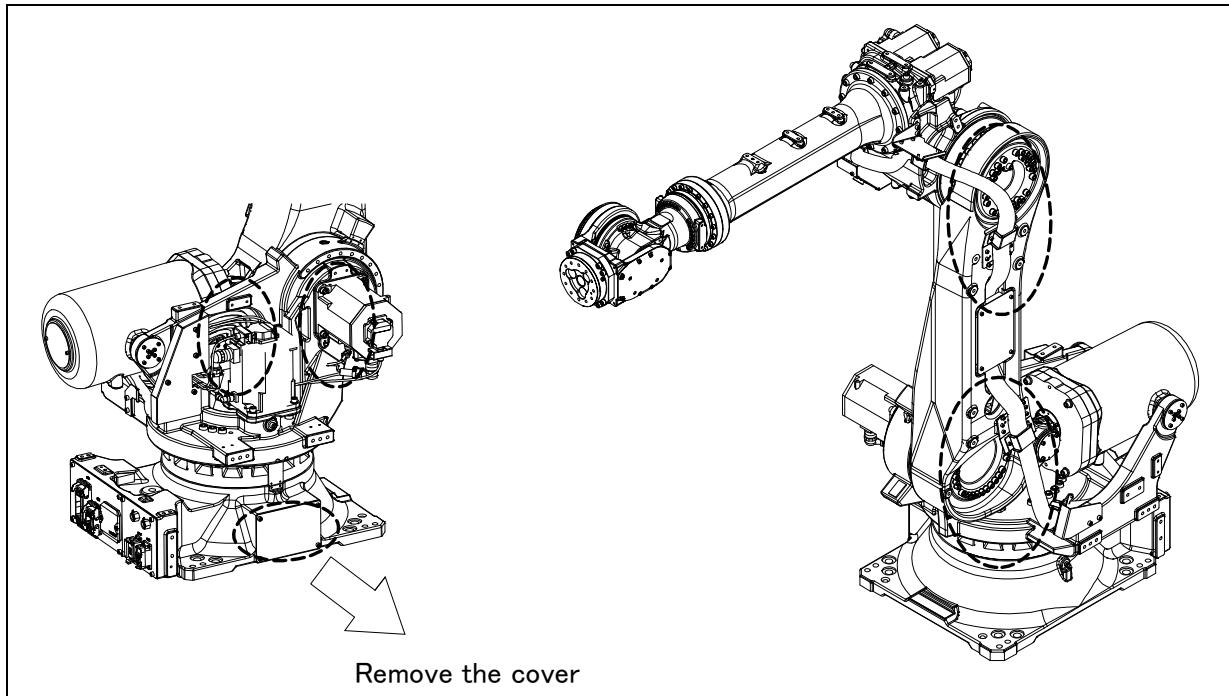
(a) Check points of the mechanical unit cables
